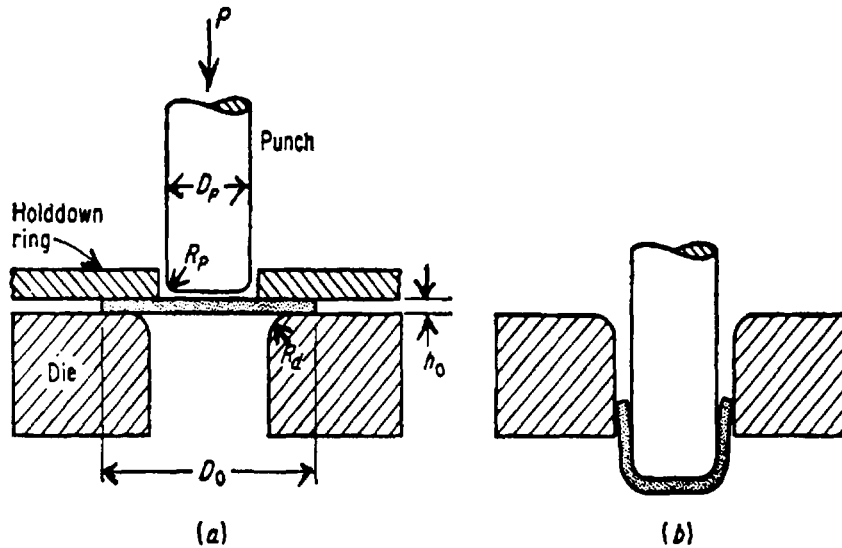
Deepdrawing of a cylindrical cup; (a) before bending, (b) after drawing.
